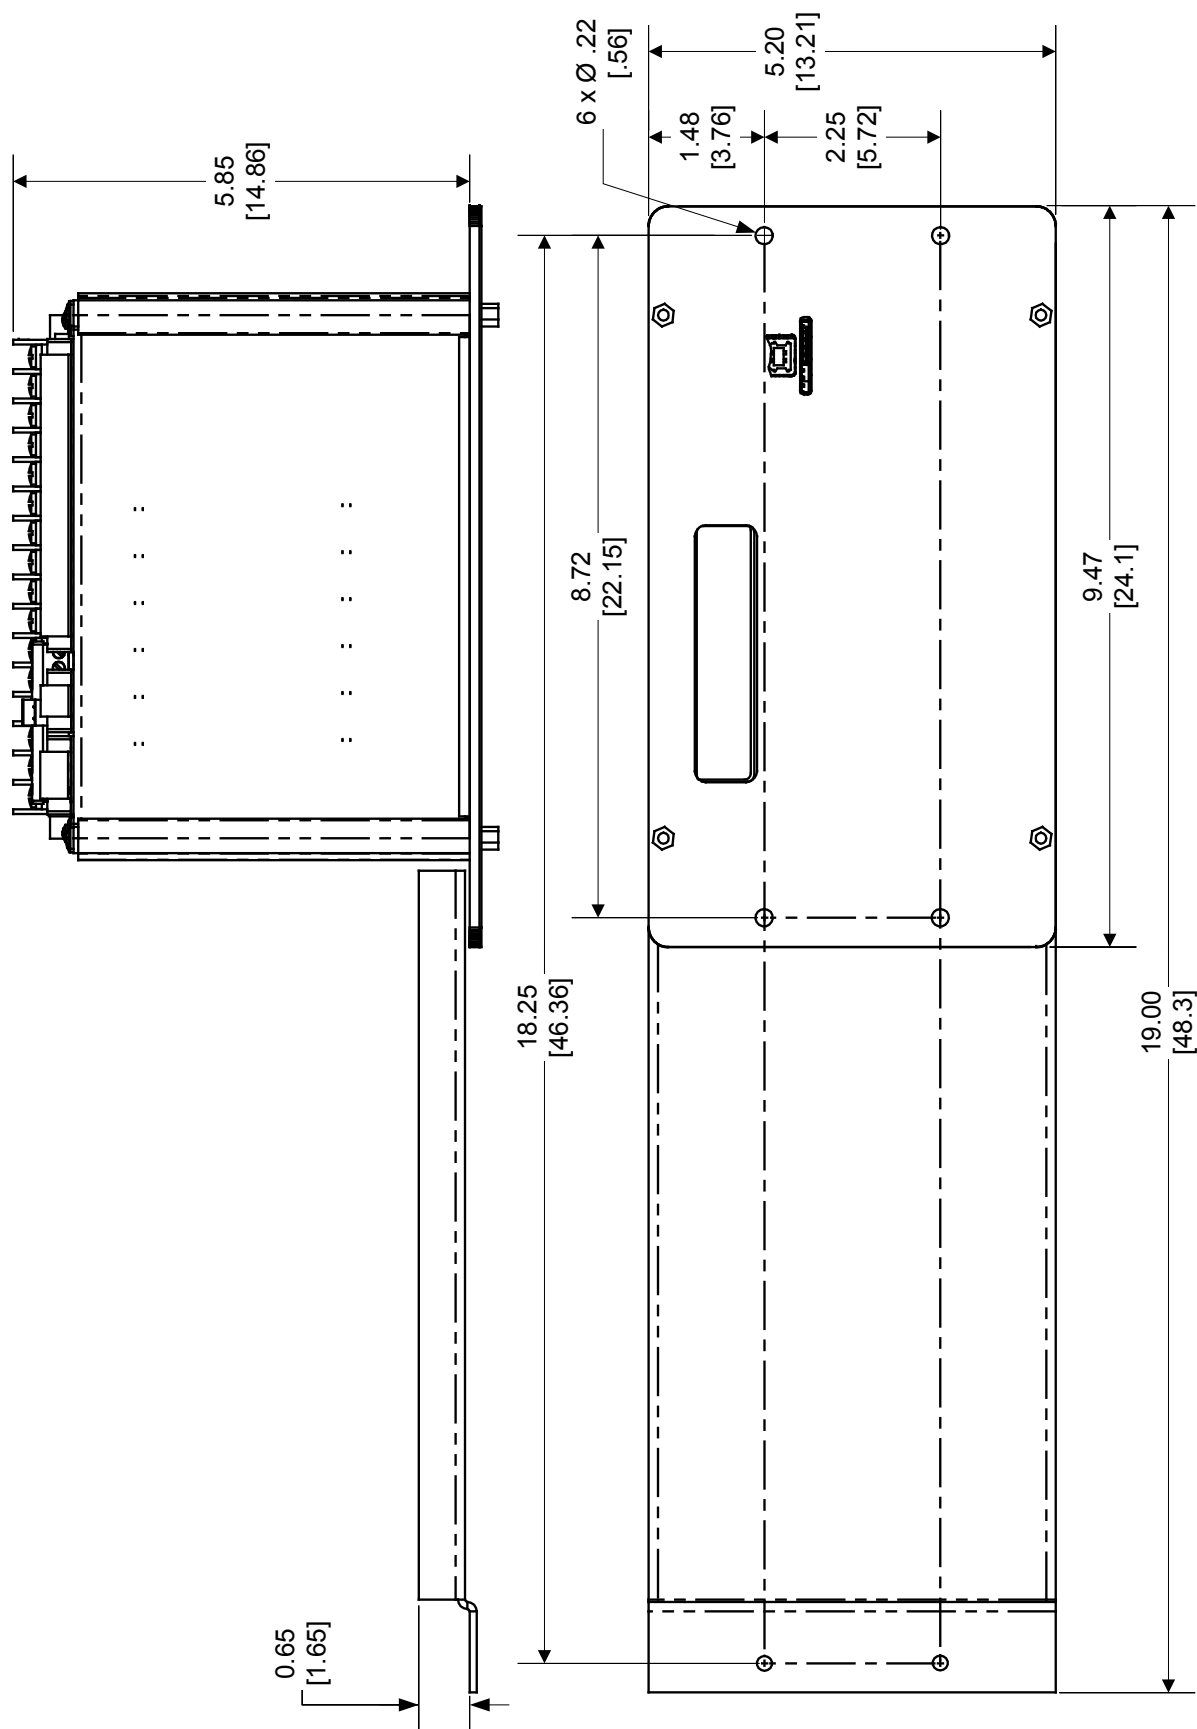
M-7651A D-PAC 19 Inch Rack Mount Adapter Frame Dimensions
